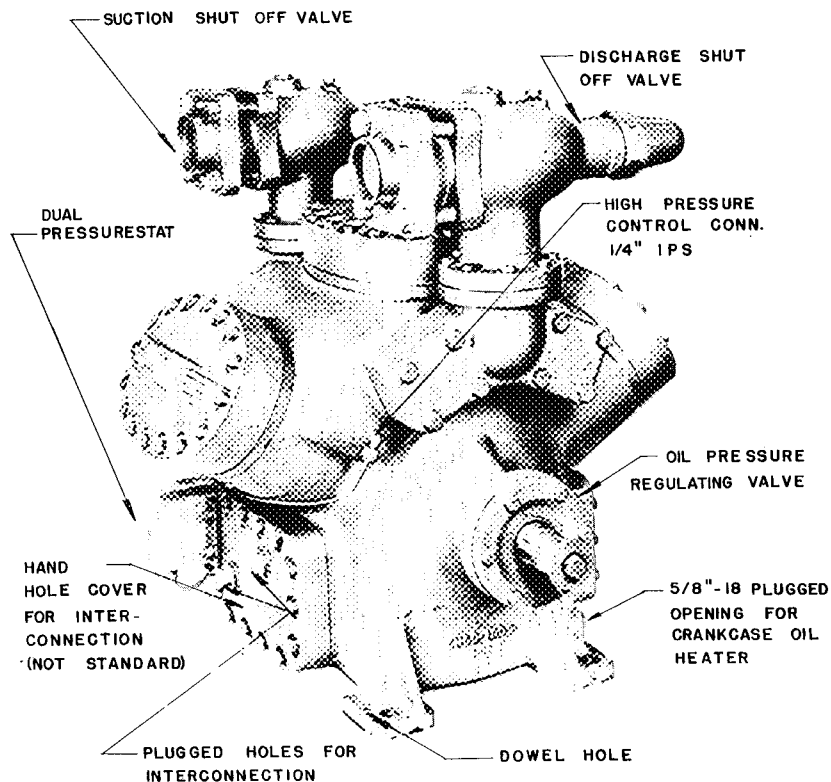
5H60 COMPRESSOR (SIDE AND PUMP END VIEW)
